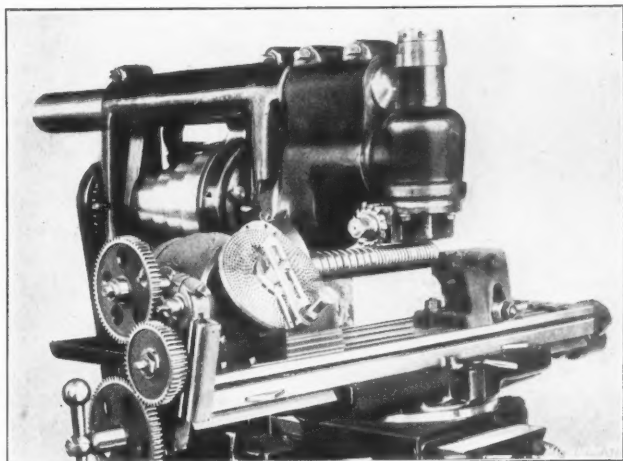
Feed-screw Geared Directly to Index Head Spindle
